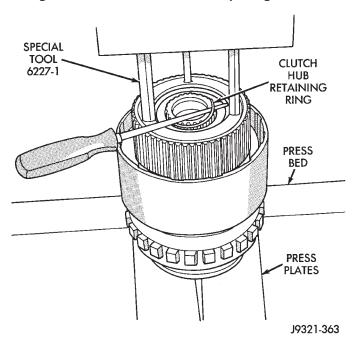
Direct Clutch Hub Retaining Ring Removal
